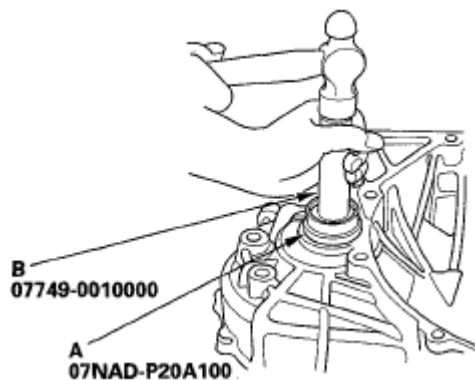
Installing Oil Seal In Clutch Housing With Oil Seal Driver Attachment And Driver
